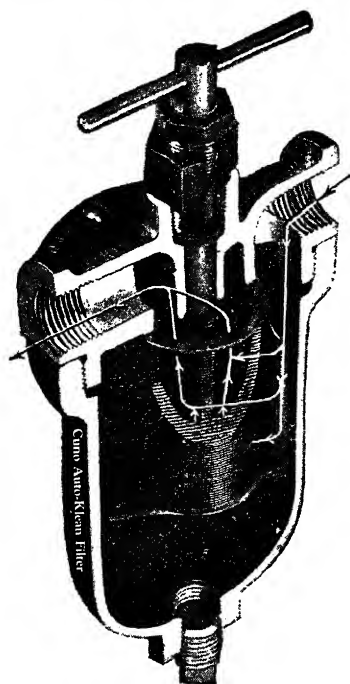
Disk oil strainer. (Courtesy of Cuno Engineering Company.)
